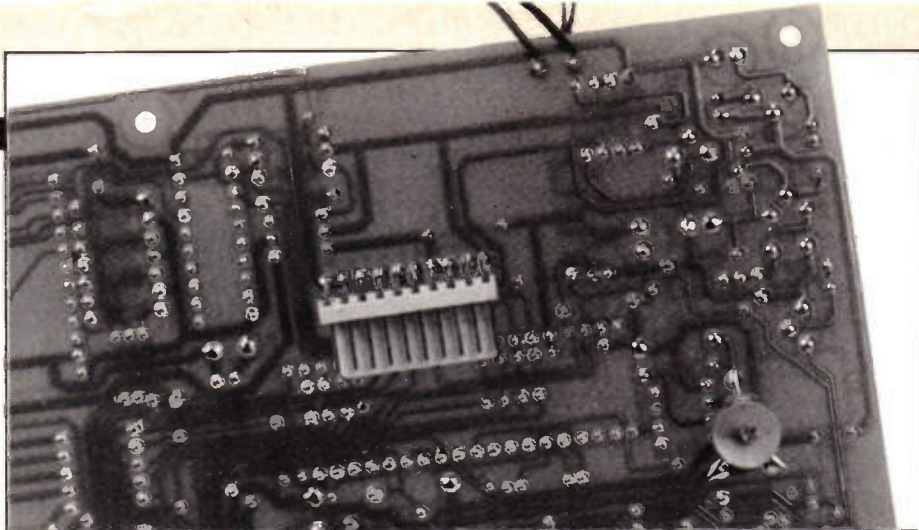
Minicon and VC1 soldered to rear of the Timer Card PCB.
